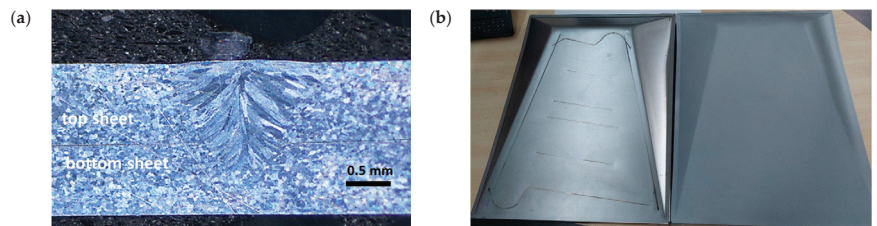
(a) Cross-section micrograph of the welding of two steel sheets and (b) welding lines on the front side of the panel: as initially welded (left) and after sand-blasting (right).
